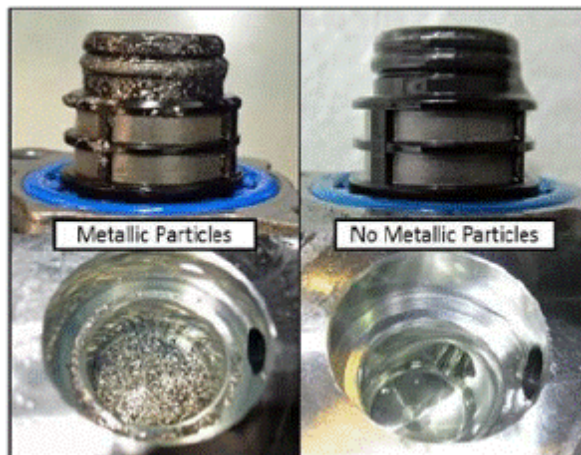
N290 fuel metering valve and valve bore shown with and without metallic particles.
